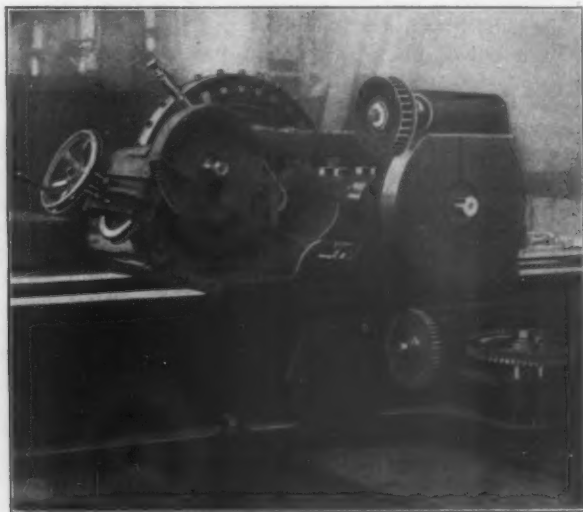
View Showing the Arrangement of the Drive for the Adjustable Head.
